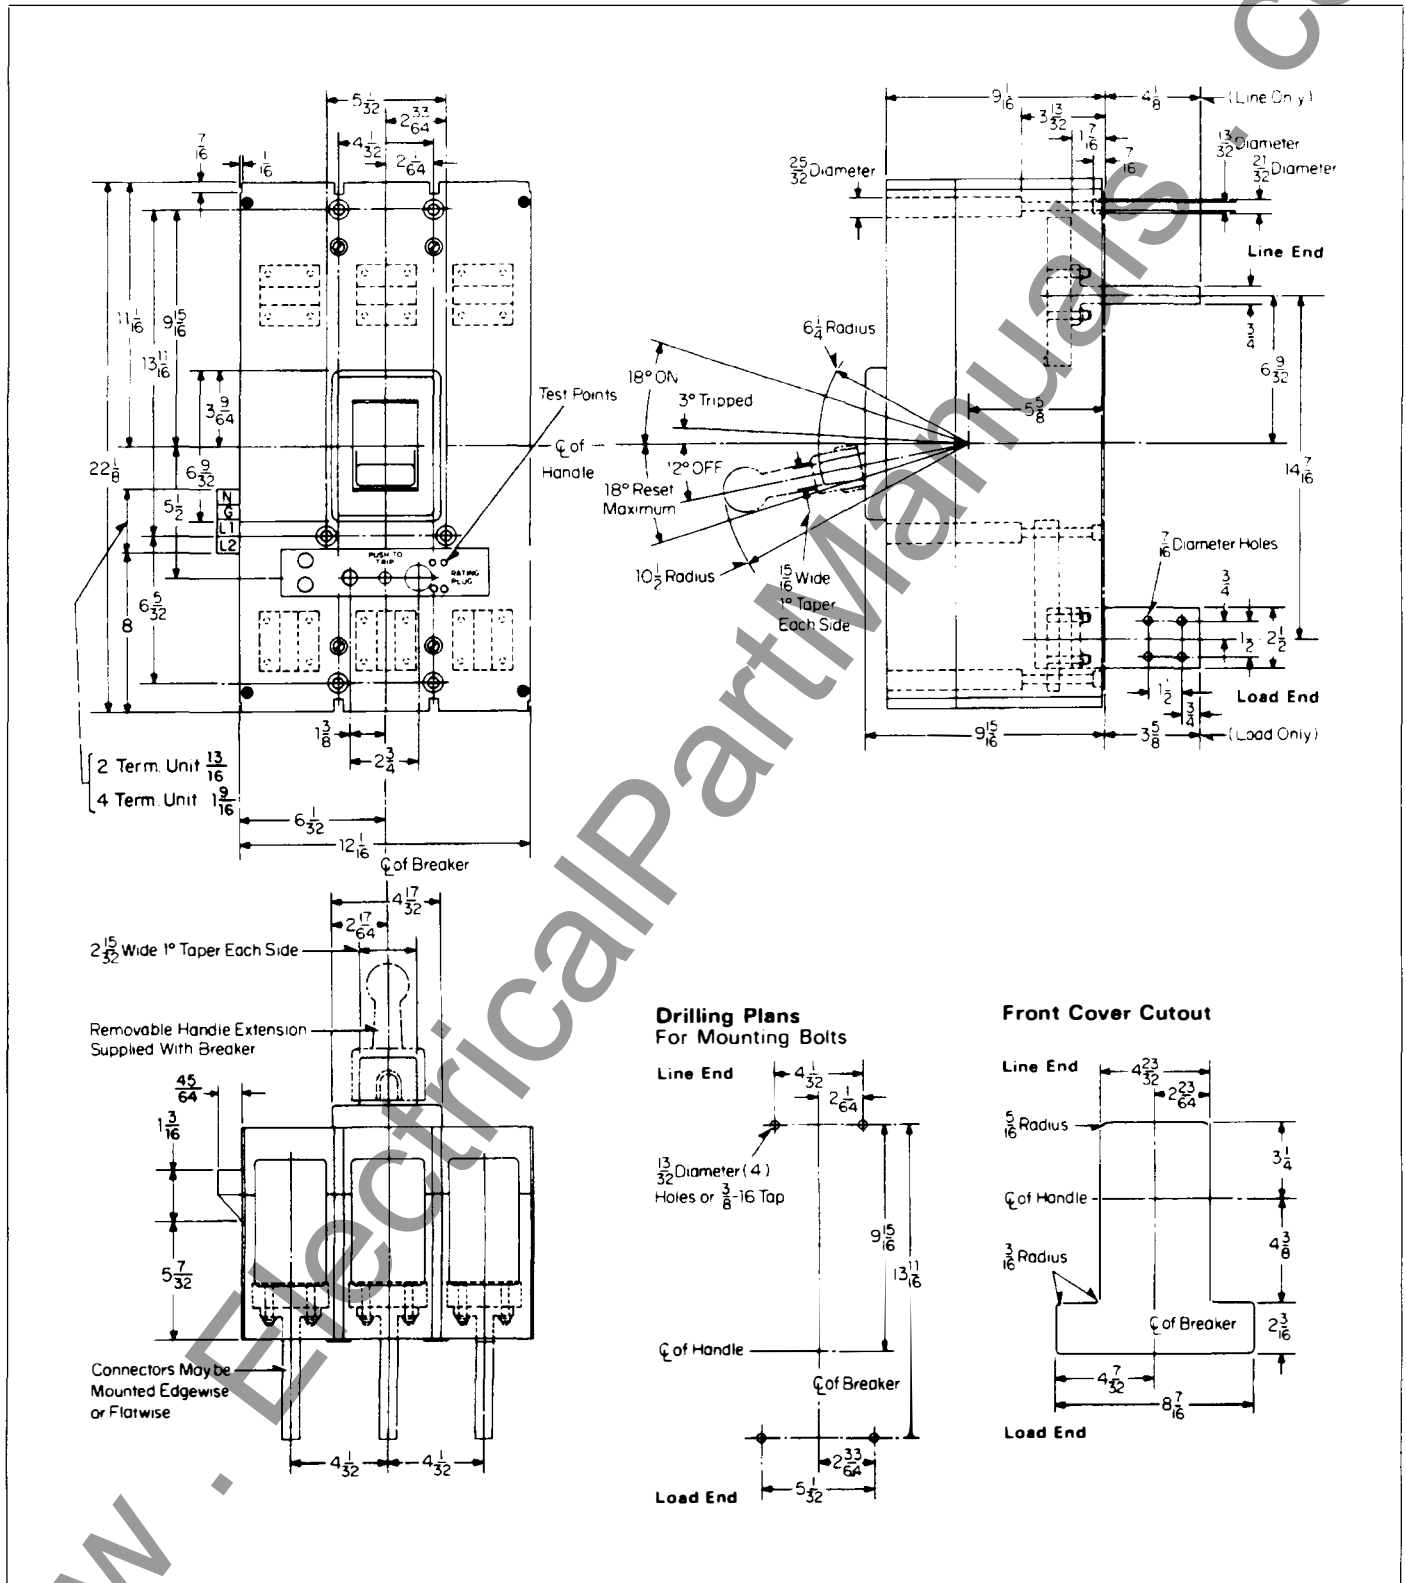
Outline Dimensions for Fixed Mounted, Rear Connected PC and PCA 2000 and 2500 SELTRONIC Breakers
